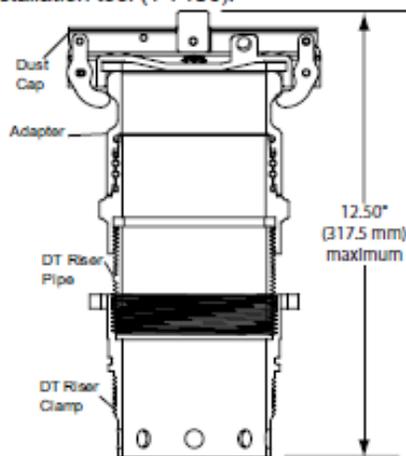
Drop Tube (DT) Riser Clamp Assembly Dimensions
